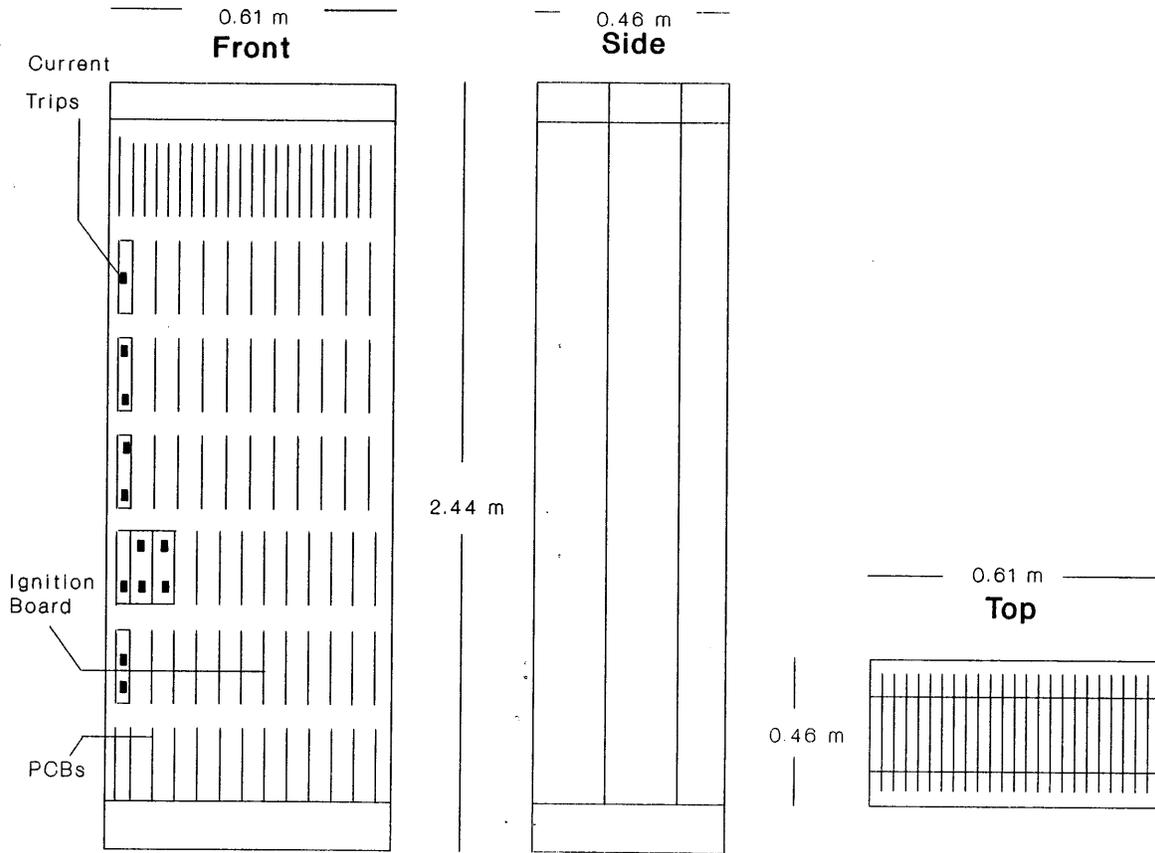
A Typical Switch Gear Bay and Position of the Ignition Board
